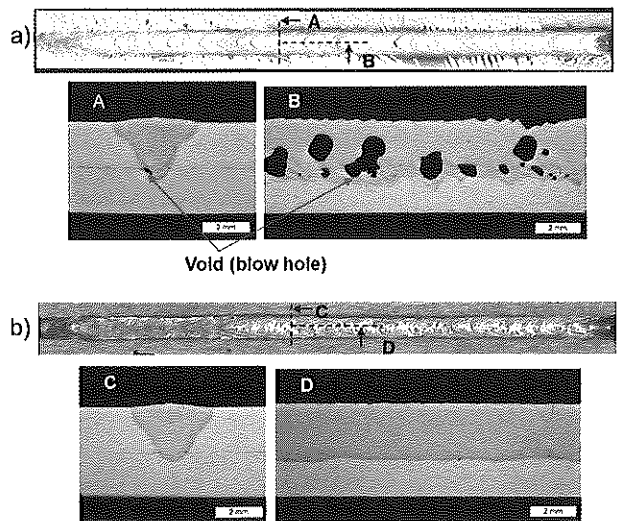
6000 Aluminum alloy lap welding using 10 kW laser. (a) Original, (b) with beam mode control
